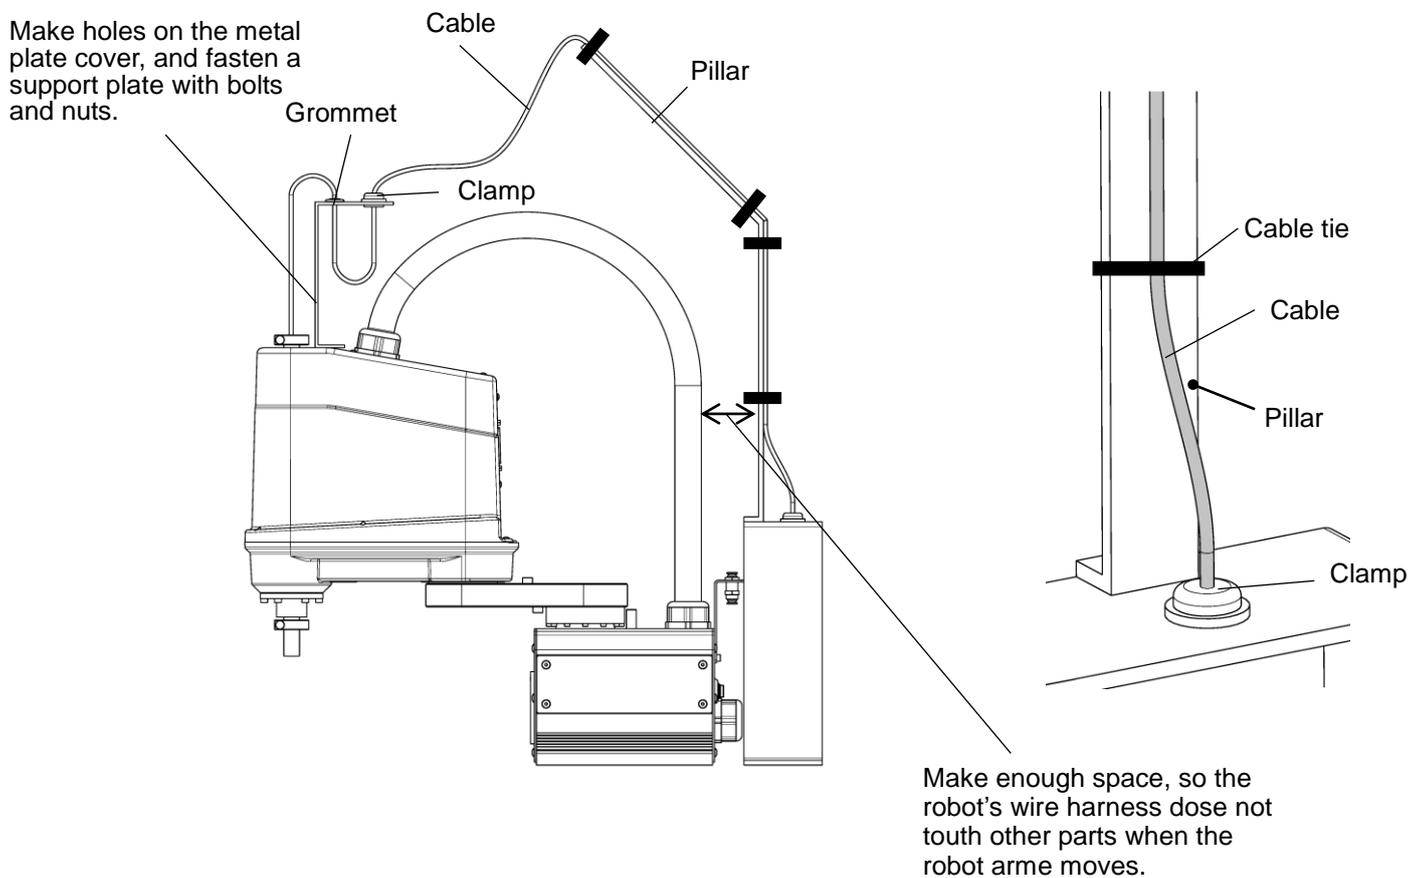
Tool cable wiring installation example (KHL-300/KHL-400)
